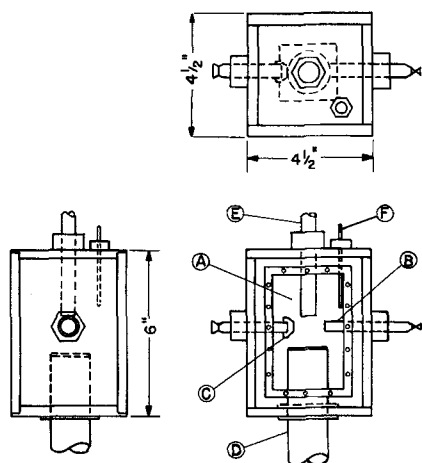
Working section. A—flat glass windows; B—movable shield, 10-mm. glass tubing; C—guide tube with rubber stop; D—aluminum approach tube; E—exit tube; F—thermometer.
